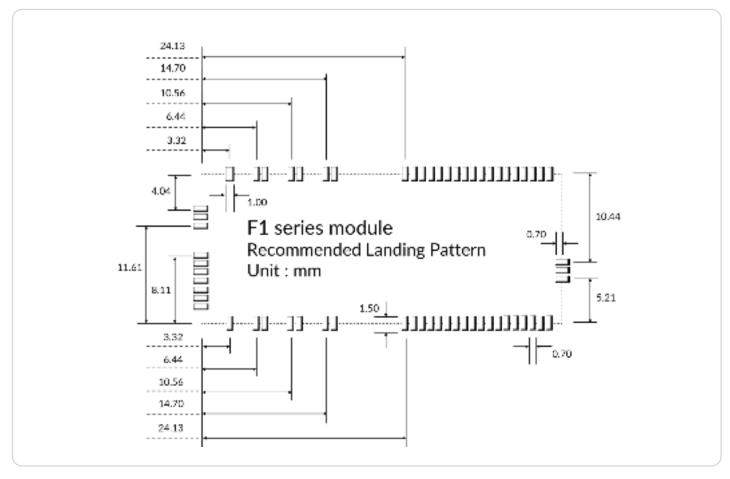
F1 Smart Module Recommended PCB Landing Pattern (Top View)
